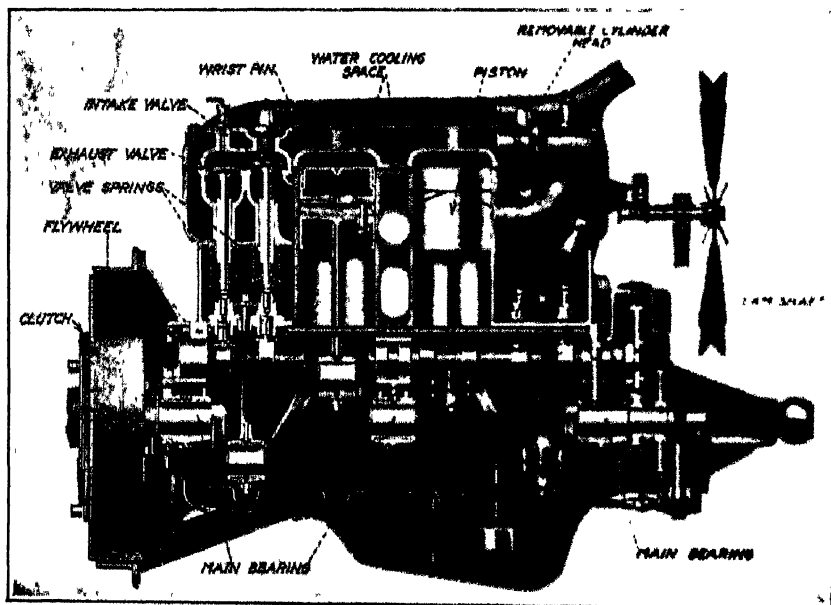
Sectional view of typical four-cylinder, four-cycle automobile engine (Dodge.)
